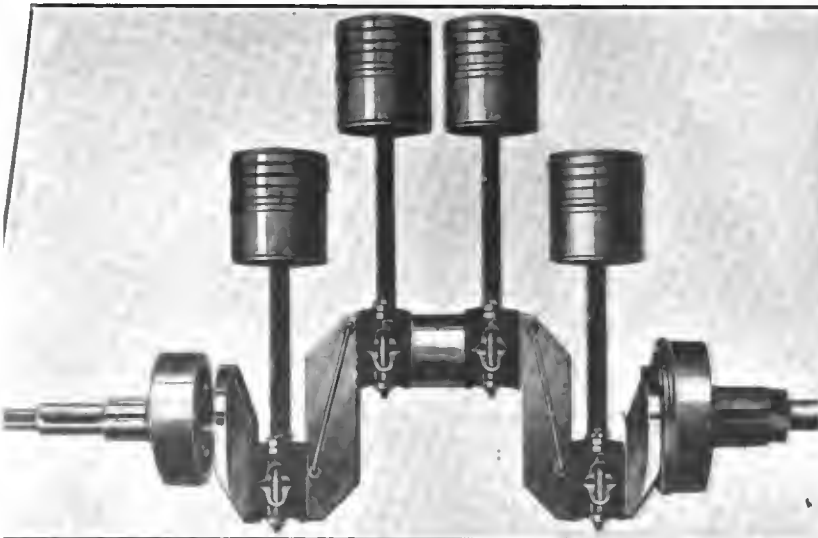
Crankshaft of substantial section with a very liberal annular type ball bearing at the transmission end, also piping system through which lubricating oil is passed to the crankpin journals.
